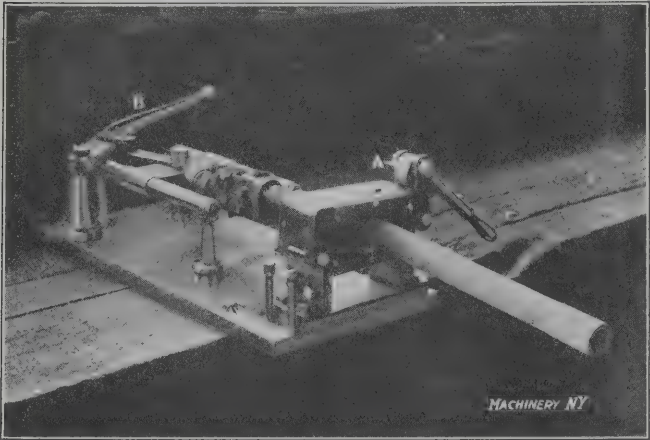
Tool for Pressing Air Hose Couplings into Place
